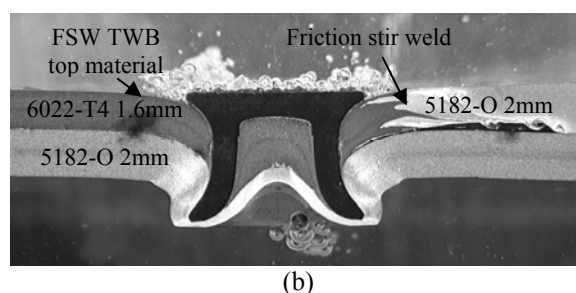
Photograph illustrating the cross section of the joint assembly where the SPR is piercing through the 6022-T4 sheet in the HAZ region of the TWB.
